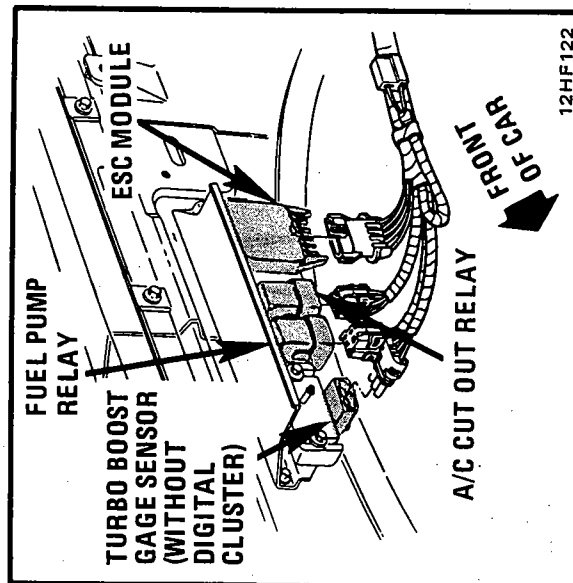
Figure C - RH Inner Fender Panel, Above Wheel Well (VIN 7)
